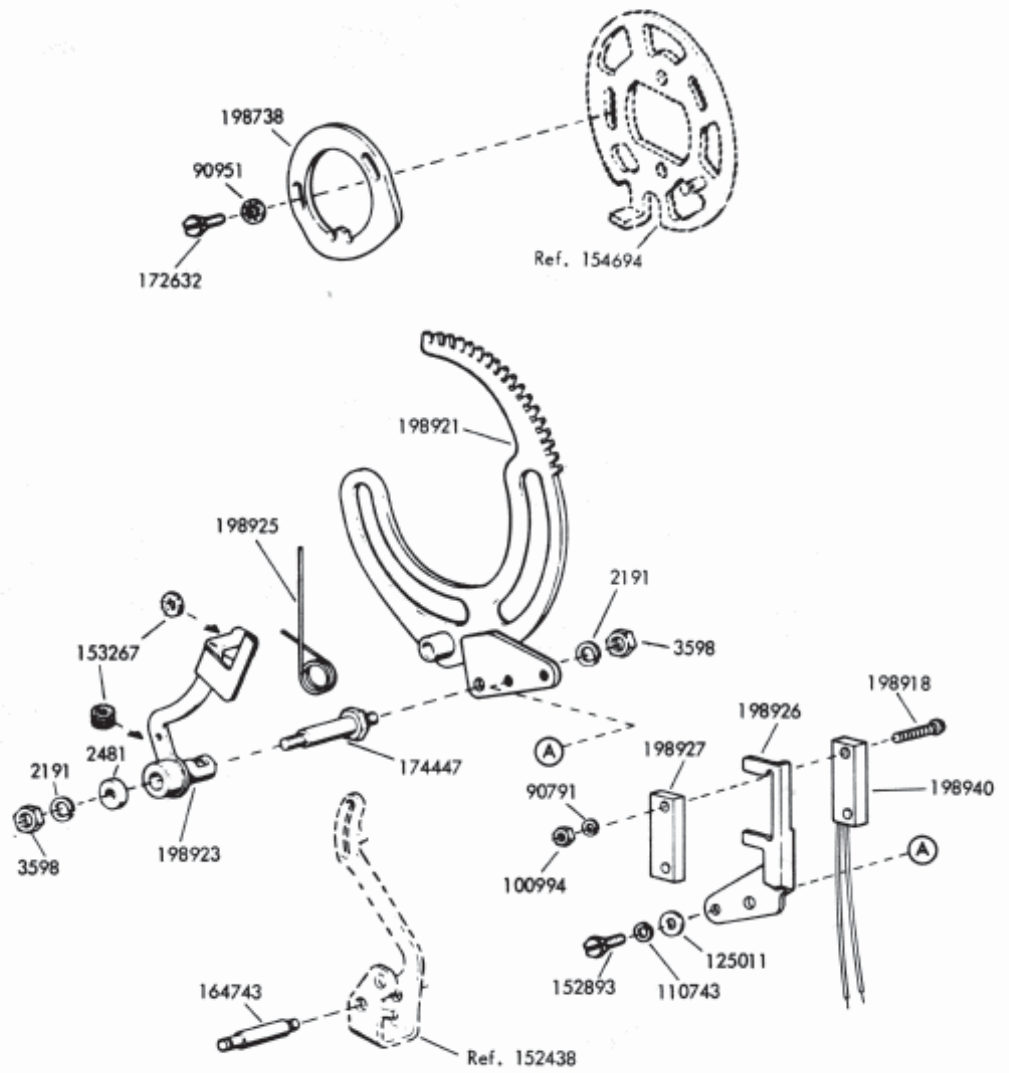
198760 TIMING CONTACT ASSEMBLY
